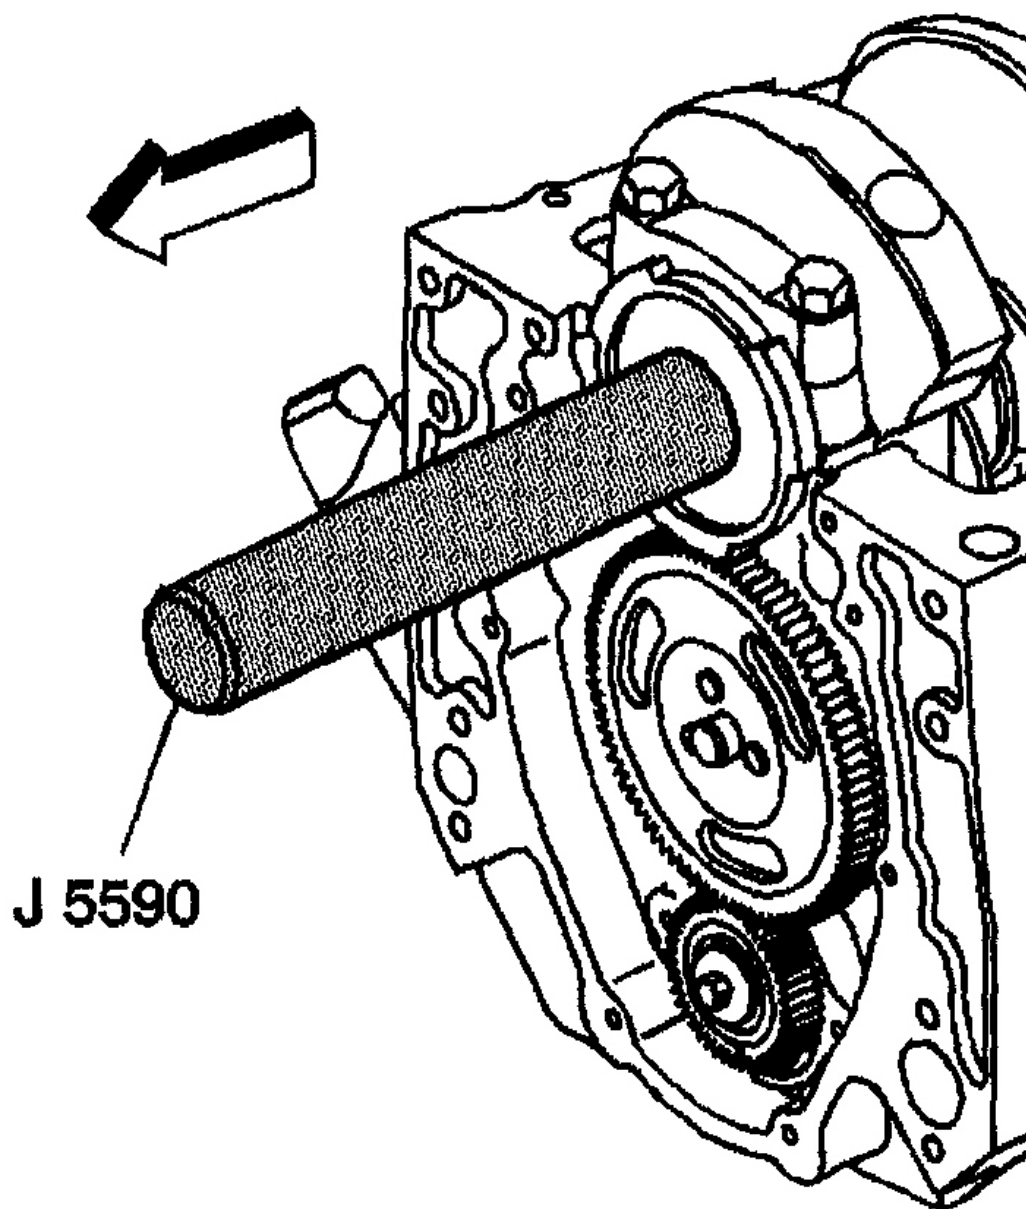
Removing Crankshaft Position Sensor Reluctor Ring
